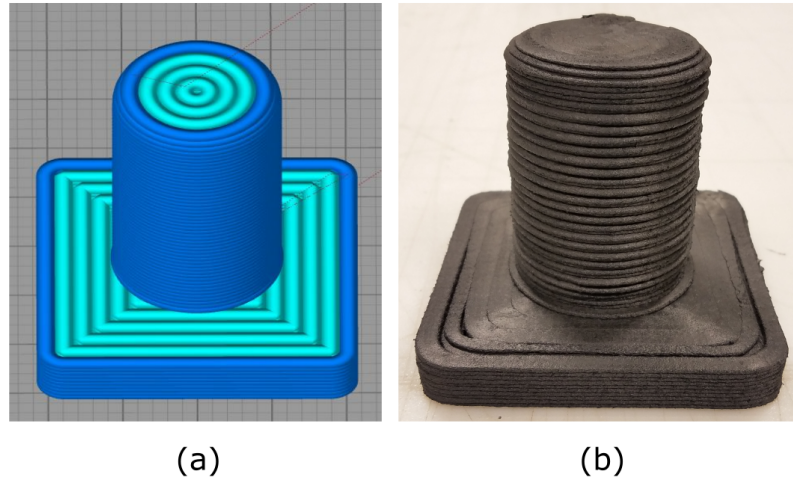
(a) Demolding test tool slicing image, and (b) the printed Demolding test tool.
